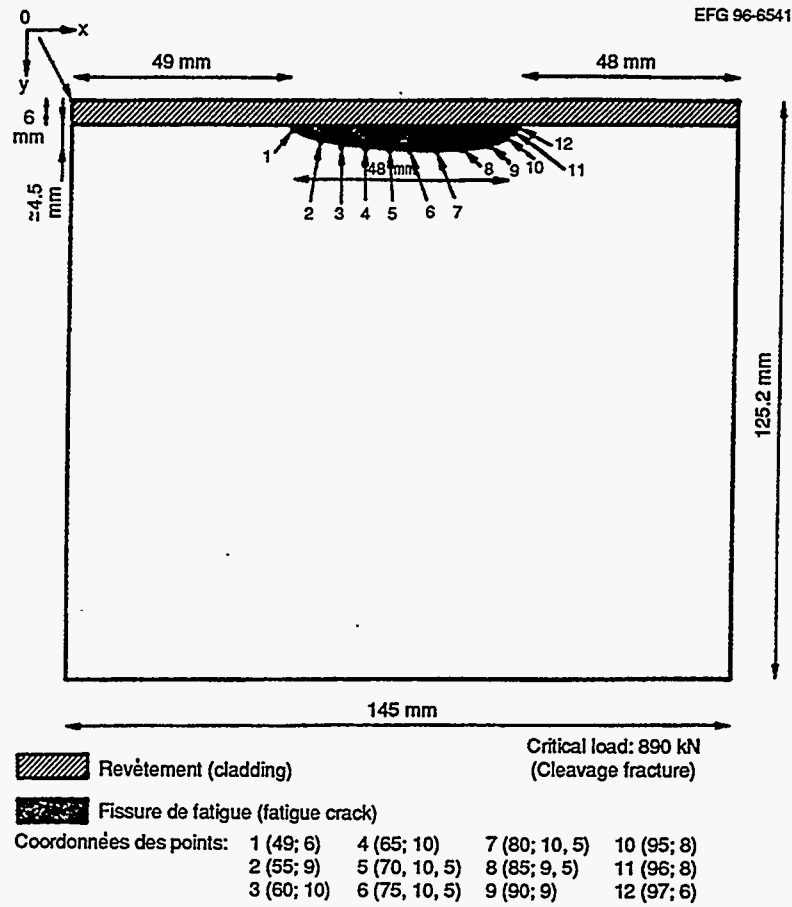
Schematic of posttest fracture surface from DD2 clad beam specimen
